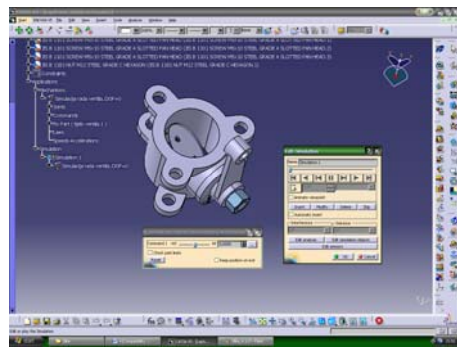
The final appearance of butterfly valve in DMU Kinematics module
